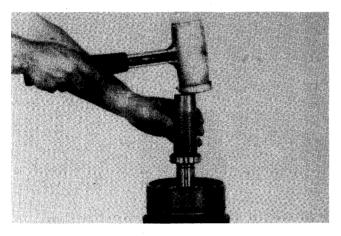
Install clutch gear inner bearing. NOTE: This bearing does not have a shield in it.
